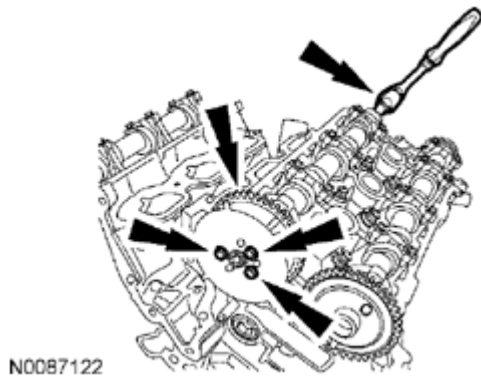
Remove/Install LH Camshaft Phaser, Sprocket And Bolts
